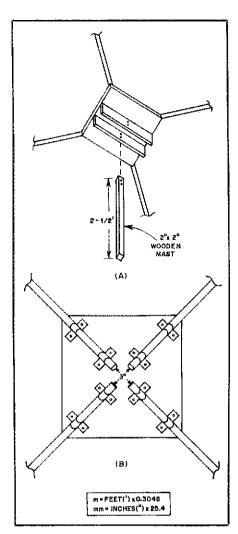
Details of the hub assembly. A shows the bottom view, and B details the top assembly.
